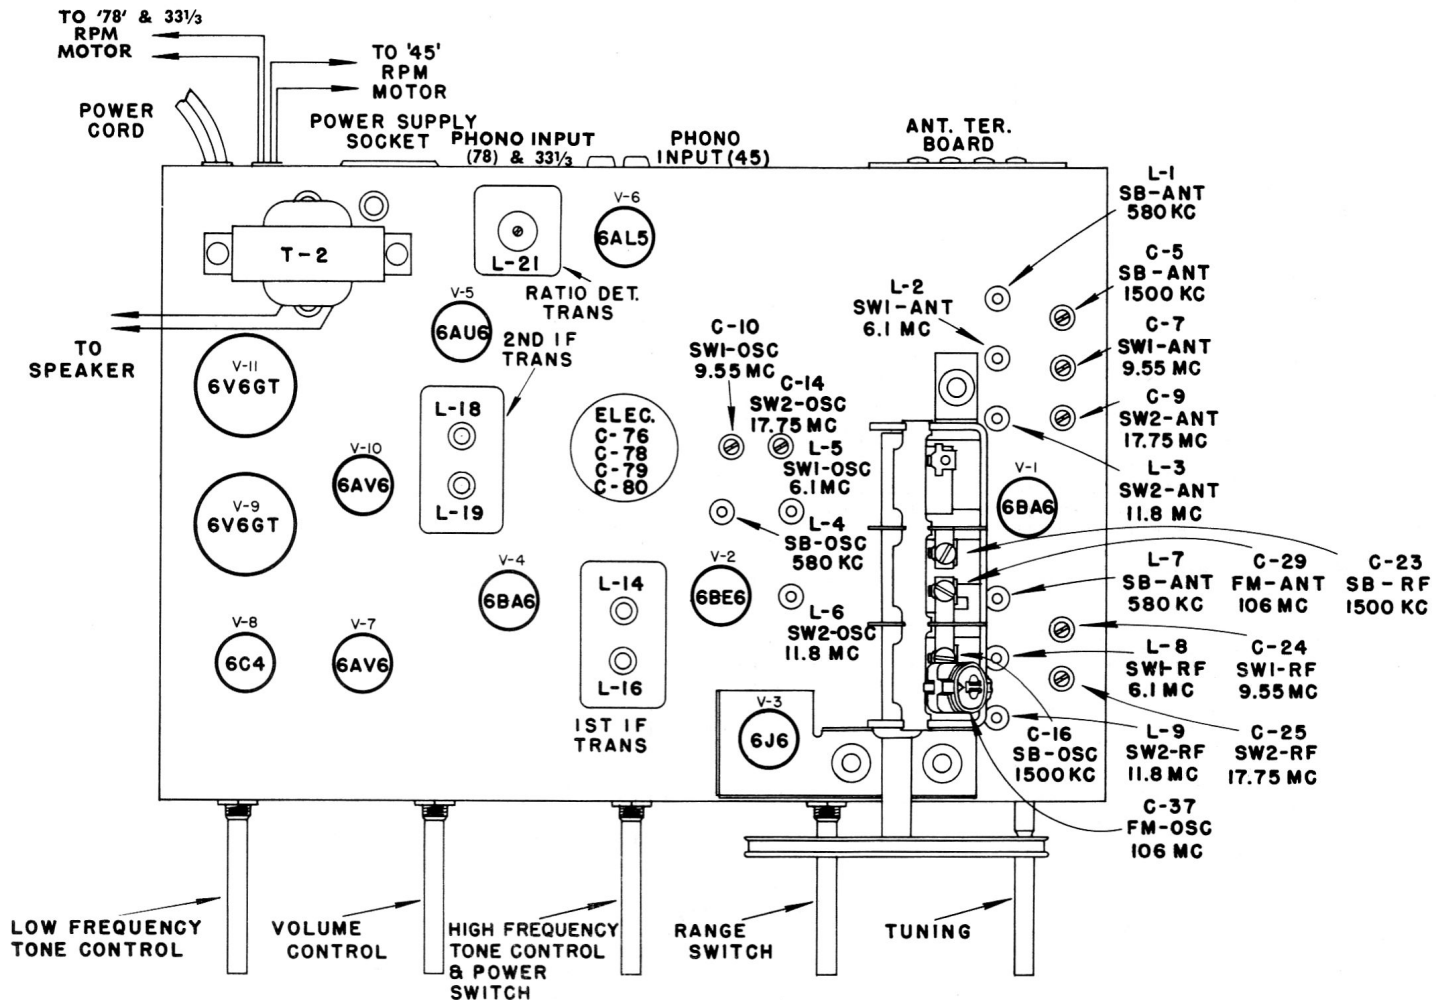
CHASSIS LAYOUT & ALIGNMENT ADJUSTMENTS
